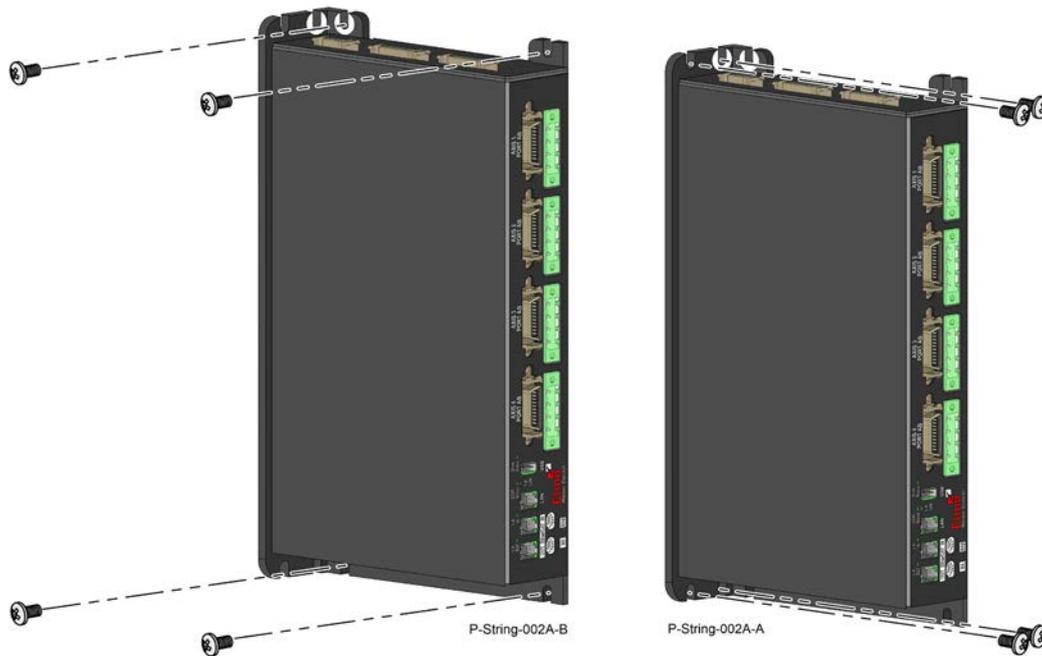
Mounting the Platinum String Quad (Quartet) L-Shape
